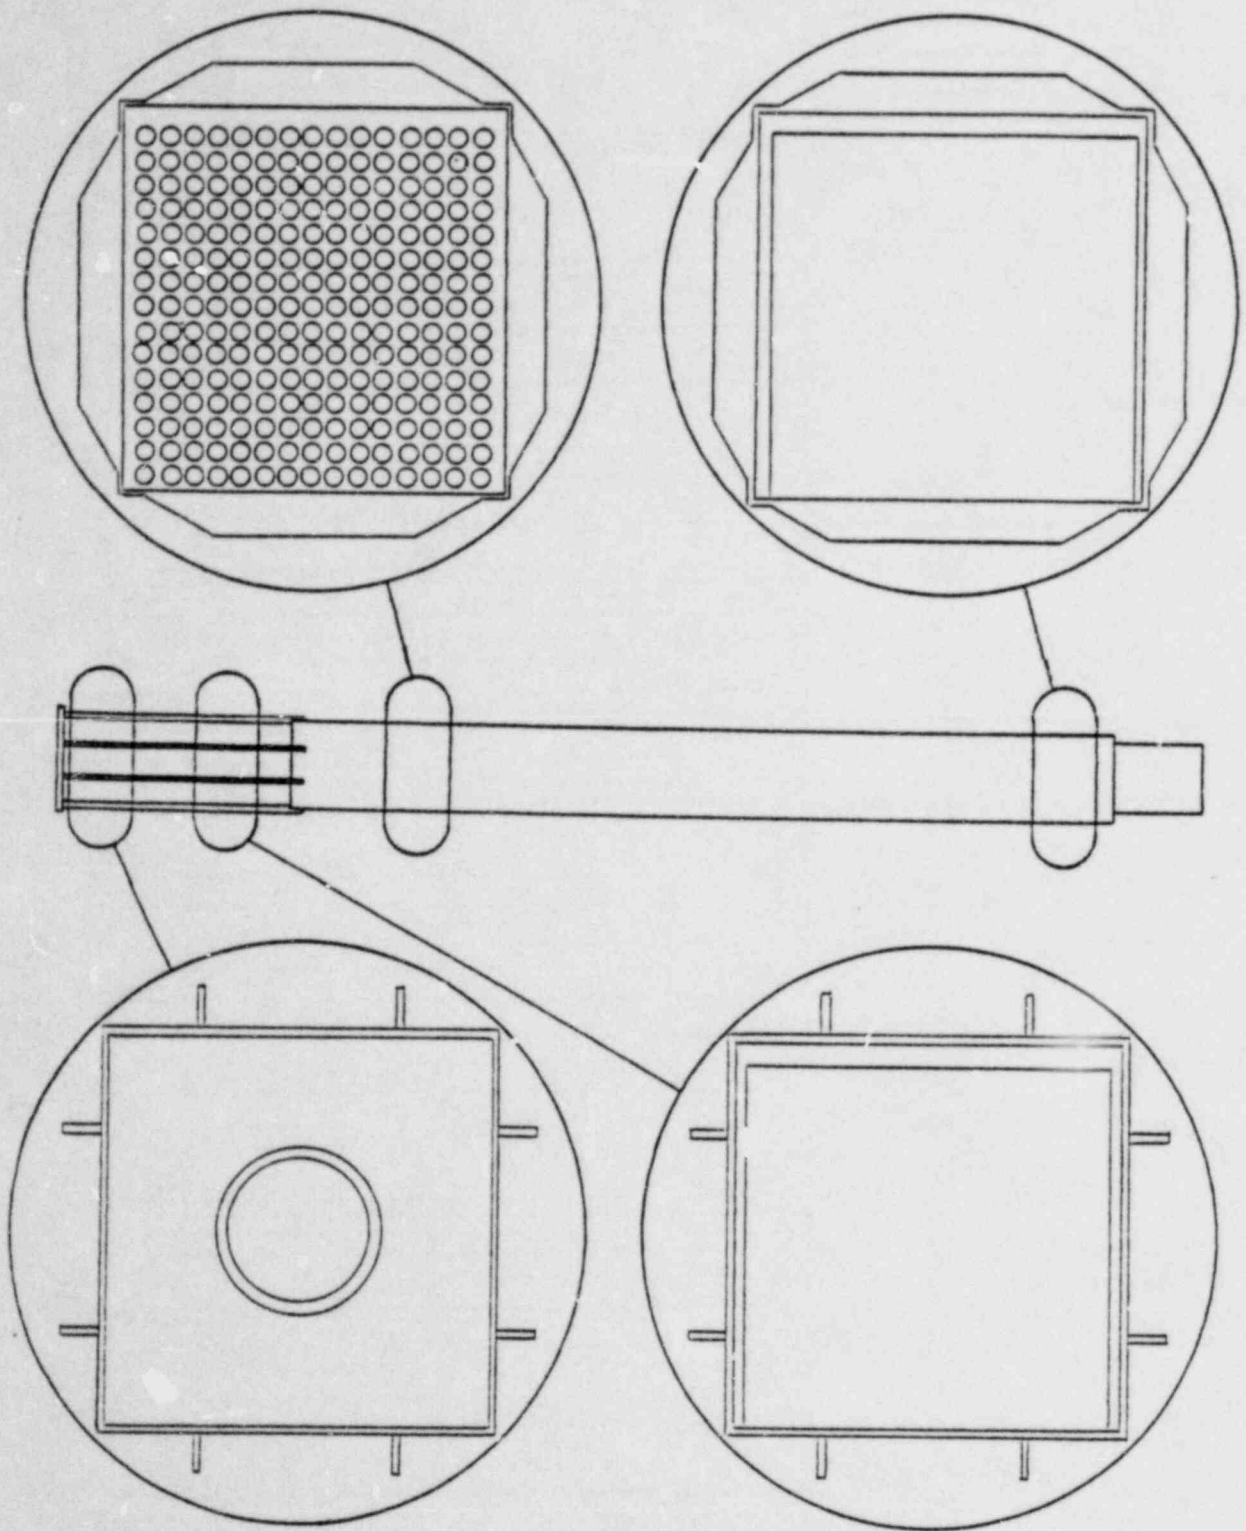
Fuel Assembly and Basket Configuration for Single PWR Fuel Assembly
